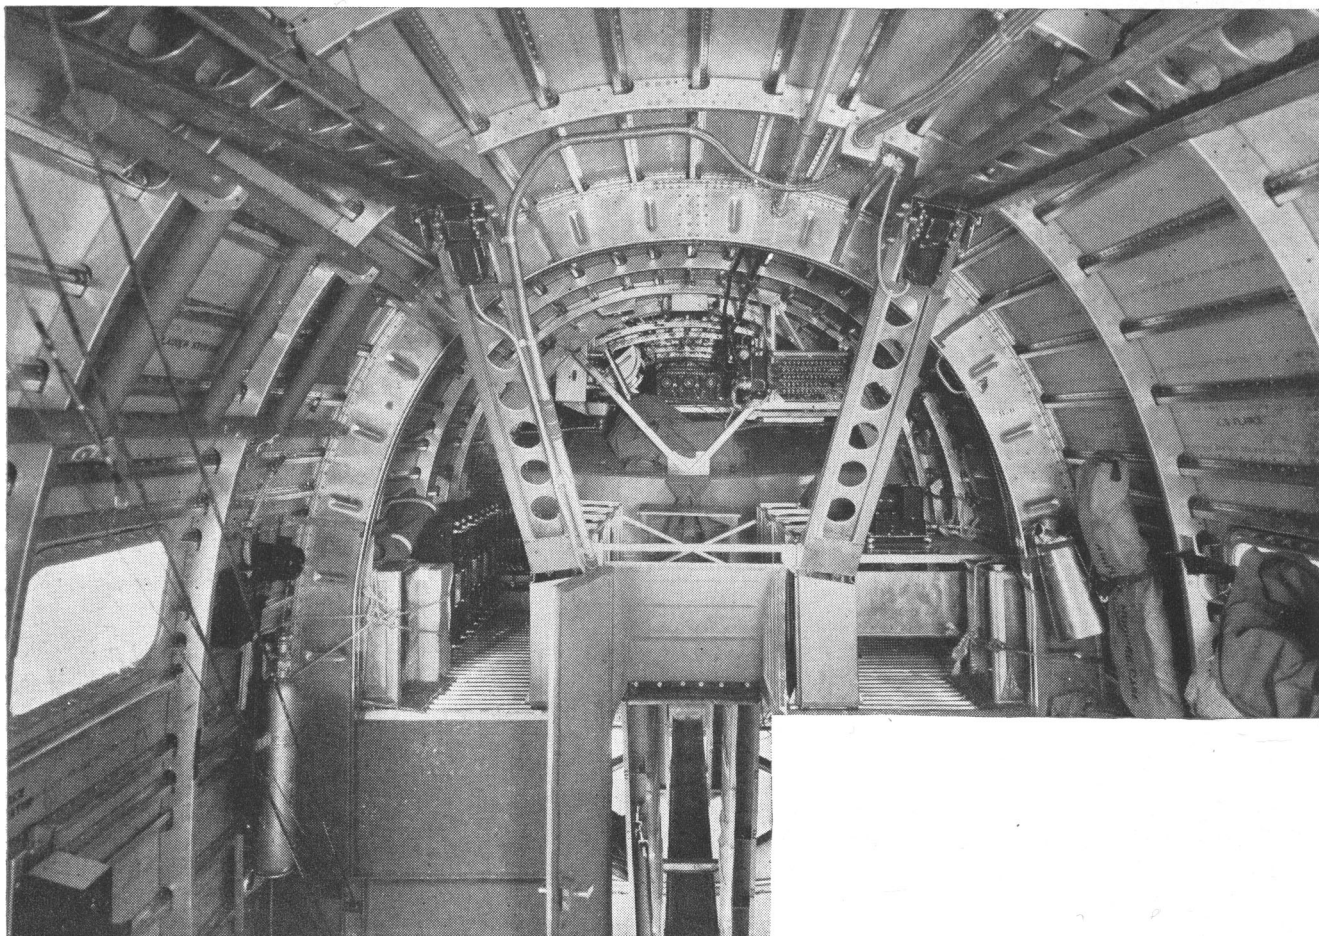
Interior view of the fuselage showing the arrangement of longitudinal stiffeners and belt frames. Also seen are ammunition tracks, and bomb-bay catwalk and racks are visible through the door in the bottom center.
